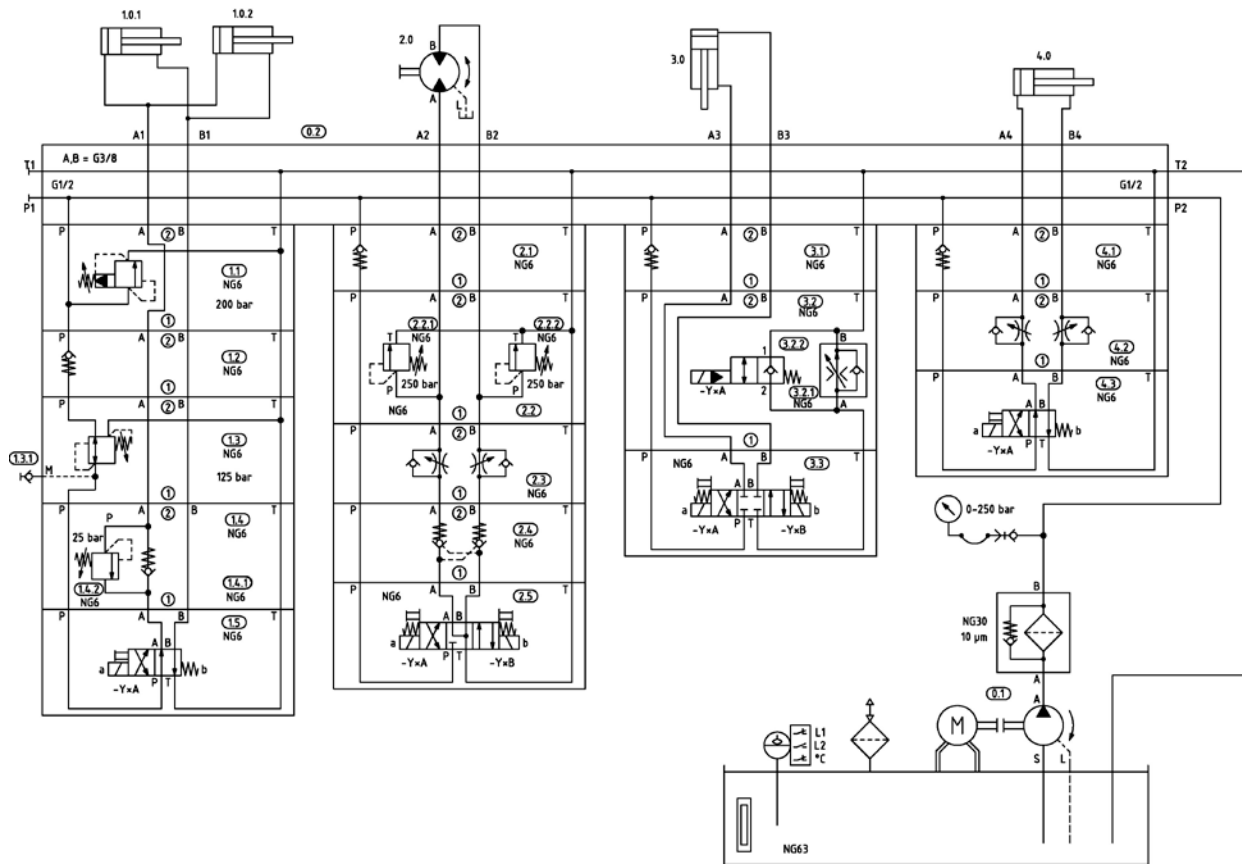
Hydraulic scheme of the turret lathe drive, made with modular equipment:
